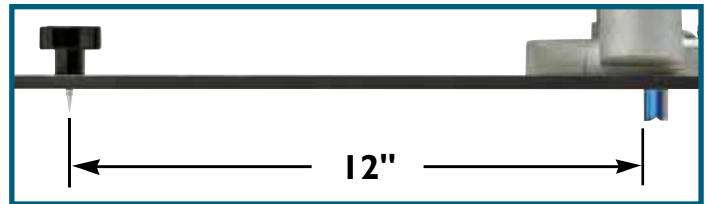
Side view of jig setup to make a 24" circle with 1/2" bit
